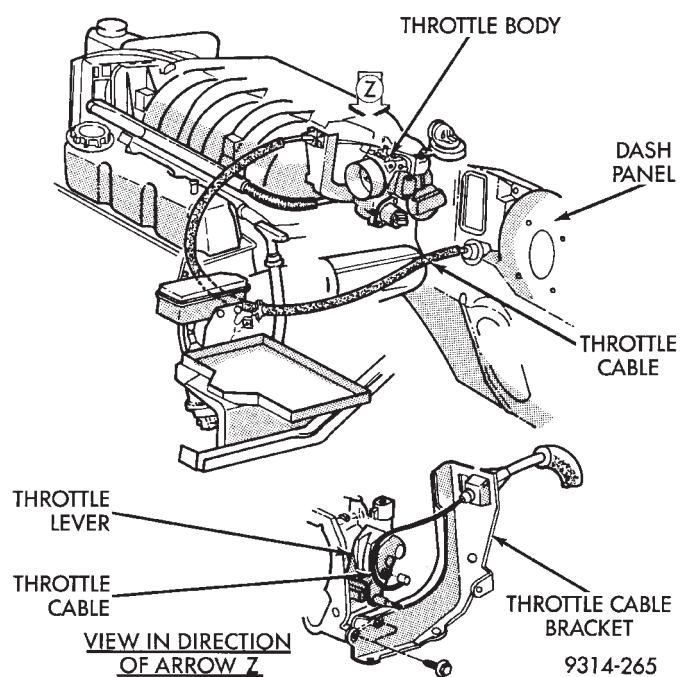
Throttle Cable Attachment to Throttle Body—2.5L MPI Flexible Fuel Engine
